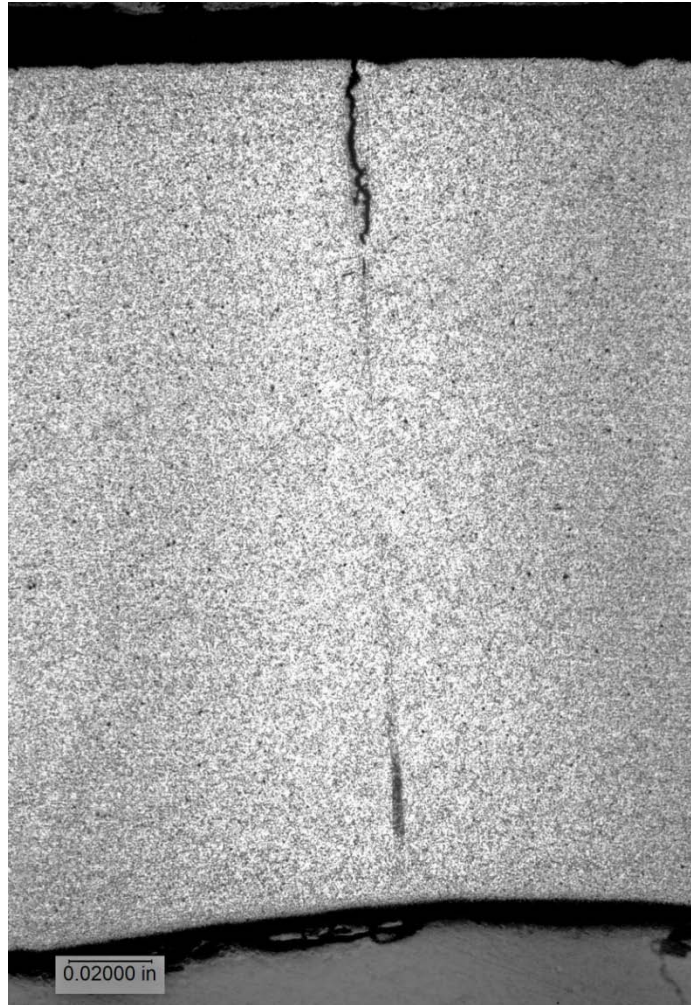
Part-Through Cold Weld in LF-ERW Pipe
